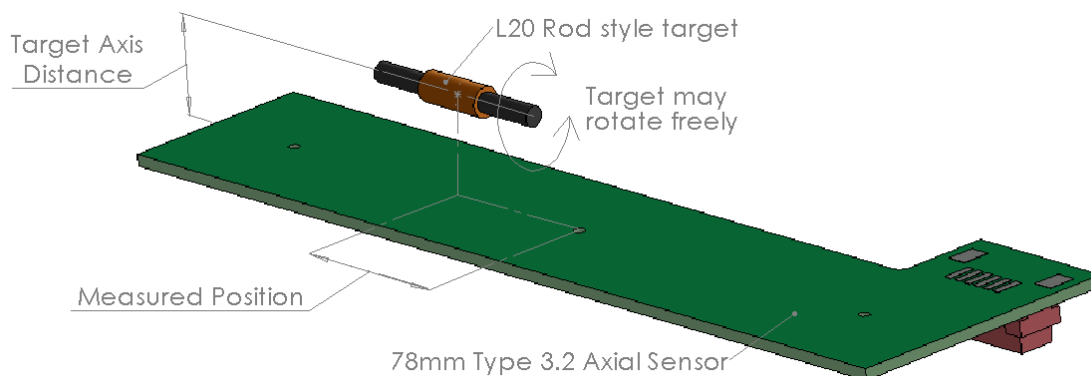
Sensor Assembly illustrated with L20 Rod style target
